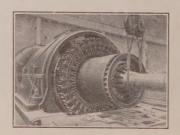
Alternator in Course of Erection (Showing Details of Stator Winding and Construction of Rotor)
